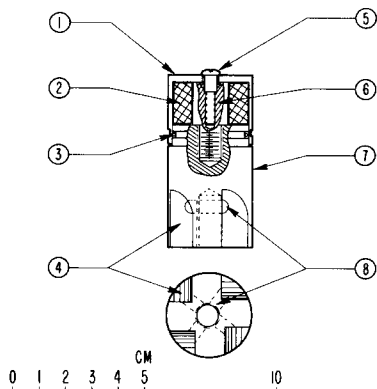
Scale drawing of rotor assembly. 1—Protective cap (Hastelloy B); 2—magnet (from Teel #1P676 pump); 3—O-ring seal (Parker #2-008, comp. E540-8; 4—milled notches; 5—screw (Hastelloy B); 6—aluminum insert for joining protective cap to base; 7—base (Teflon); 8—0.5 cm holes drilled through base.
